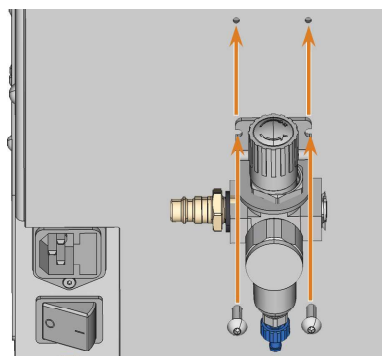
MOUNTING THE COMPRESSED AIR REGULATOR
